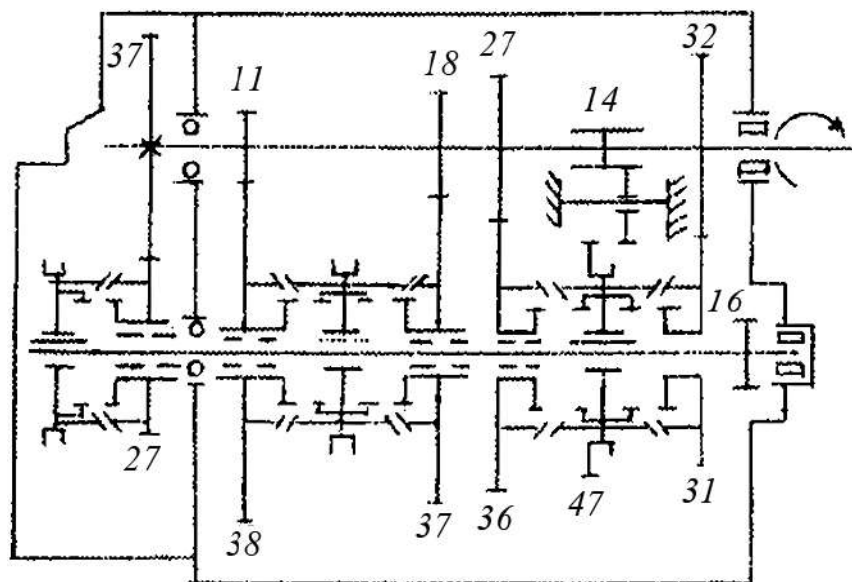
Kinematic diagram of the gearbox of the ZAZ-1102 car
